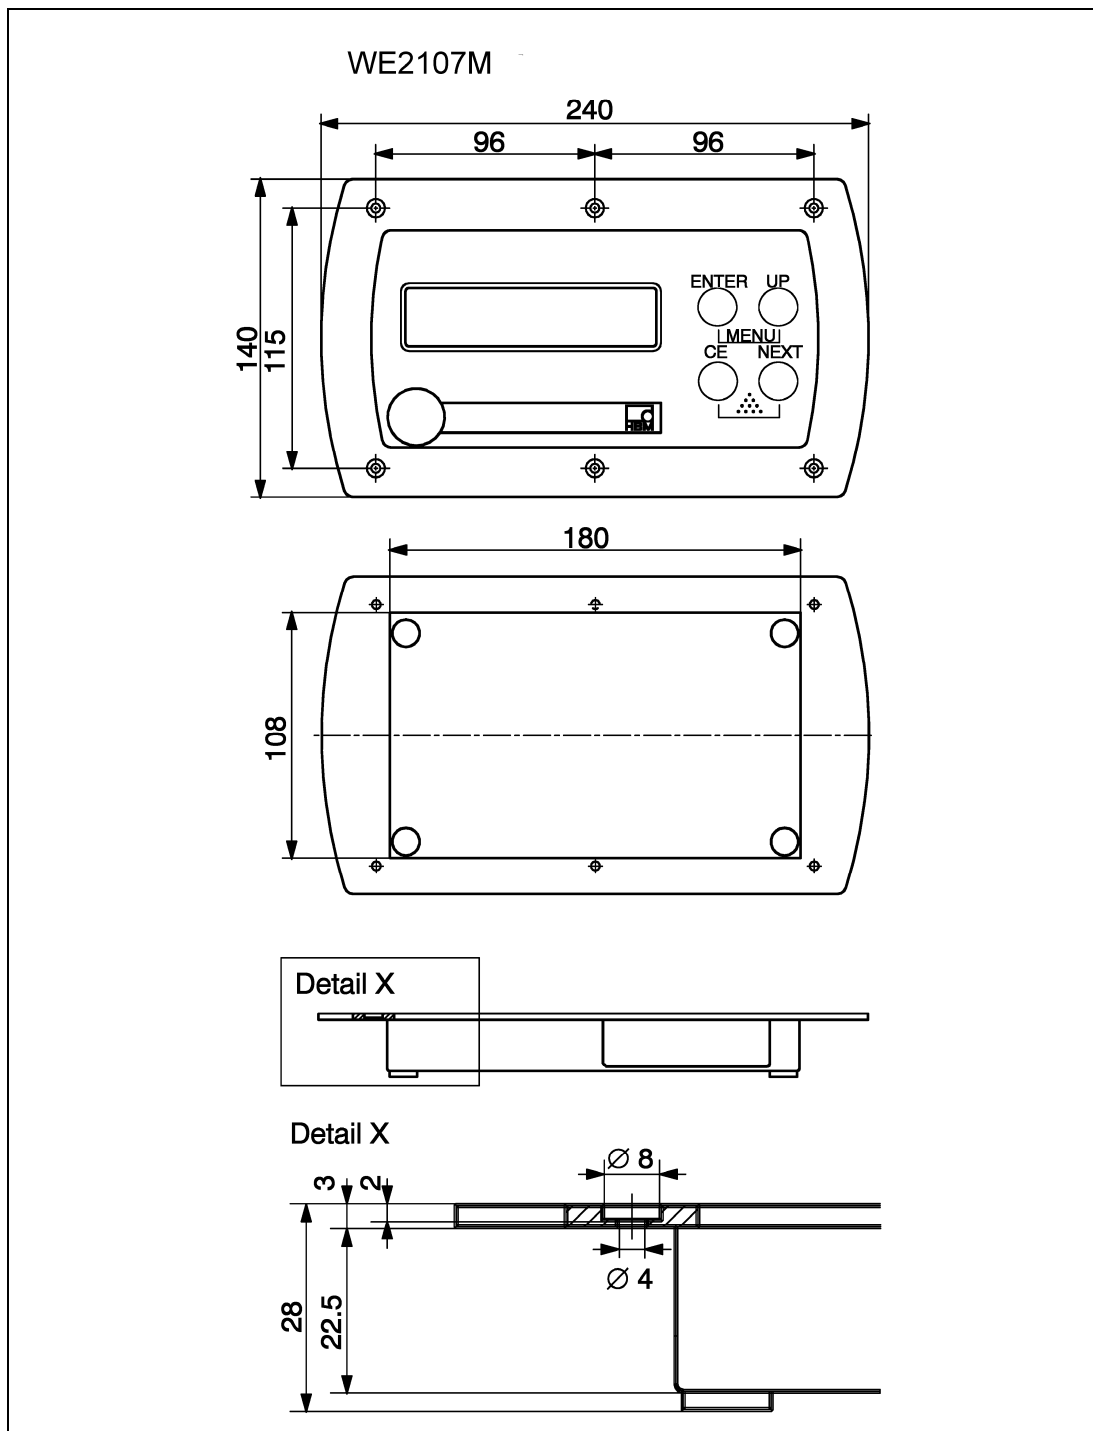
WE2107M dimensions (stainless steel front panel)
